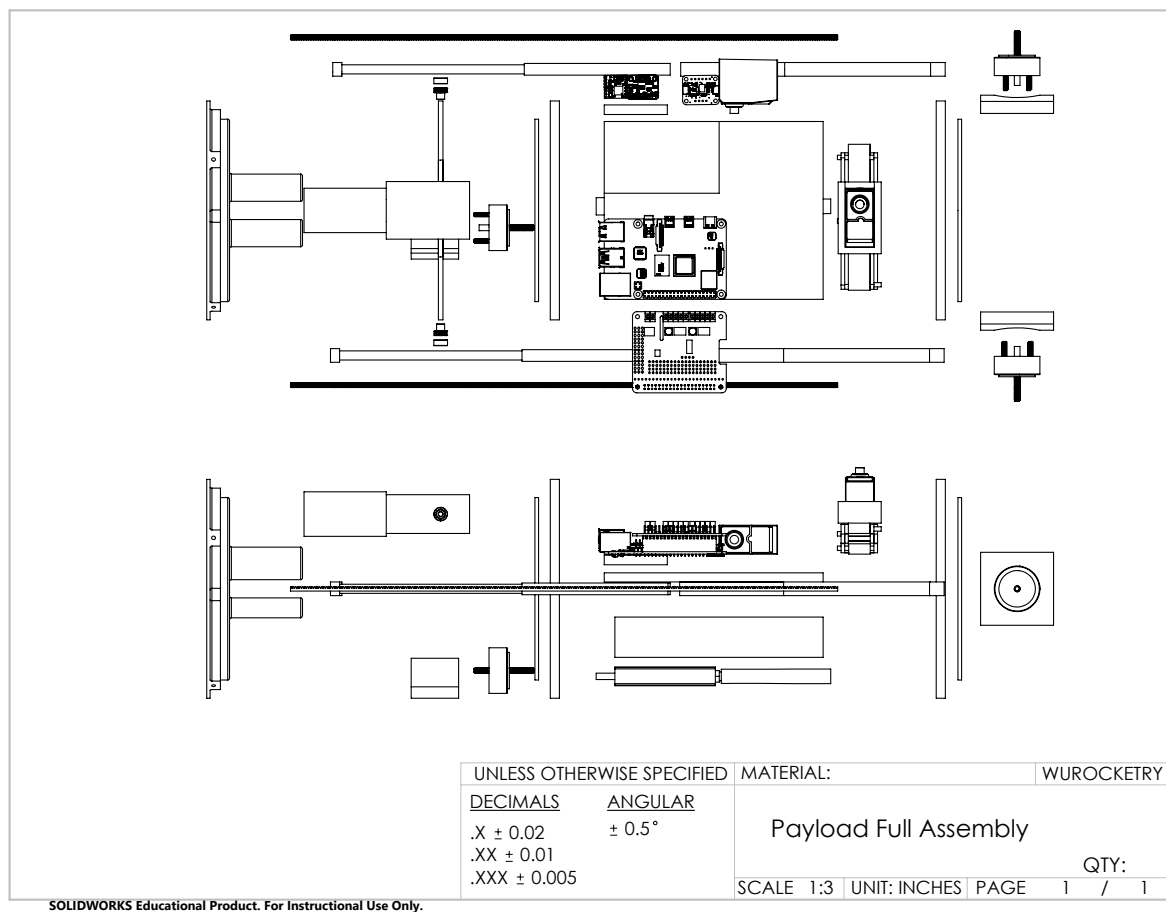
Exploded Top View of Payload Component Layout. The right side inserts into the nosecone and the left side inserts into the forward body tube.
